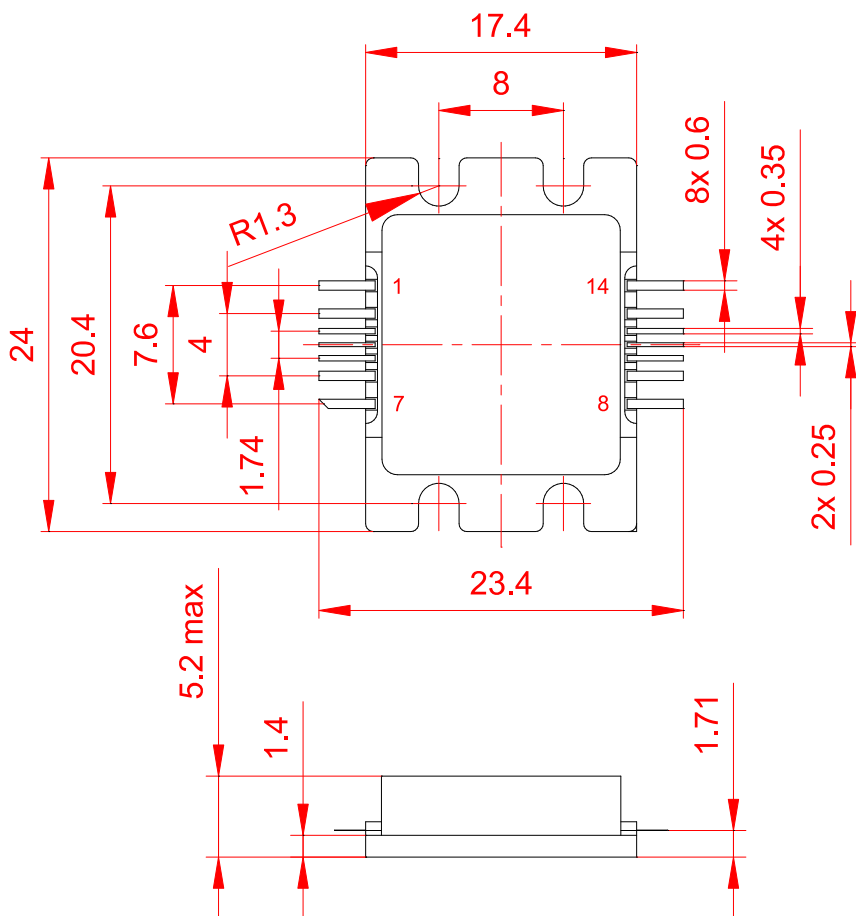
ERZ-HPA-2700-3100-43-P Outline Drawing
